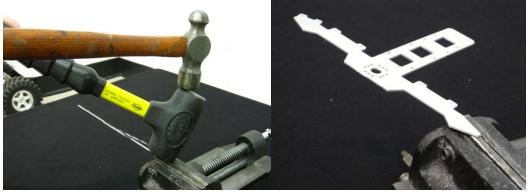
The mallet should make contact with the part in order to prevent scratches that may be caused by the impact of the hammer.
